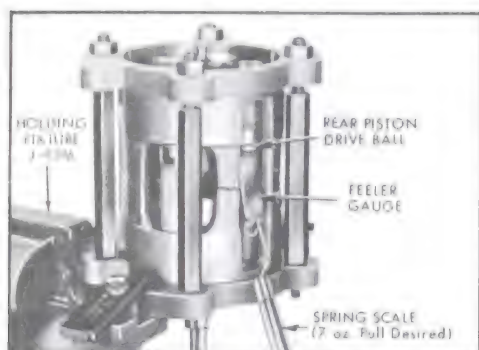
Checking Selected Feeler Gauge with Spring Scale
